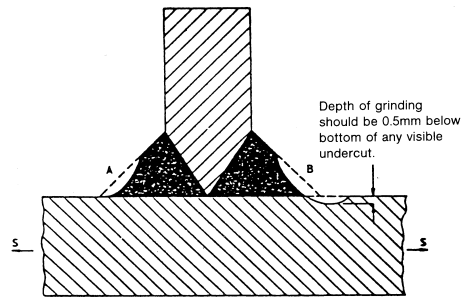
Grinding a weld toe tangentially to the plate surface (A) will produce little improvement in strength. Grinding must extend below the plate surface (B) in order to remove toe defects, from DNV Class. Notes 30.2.
